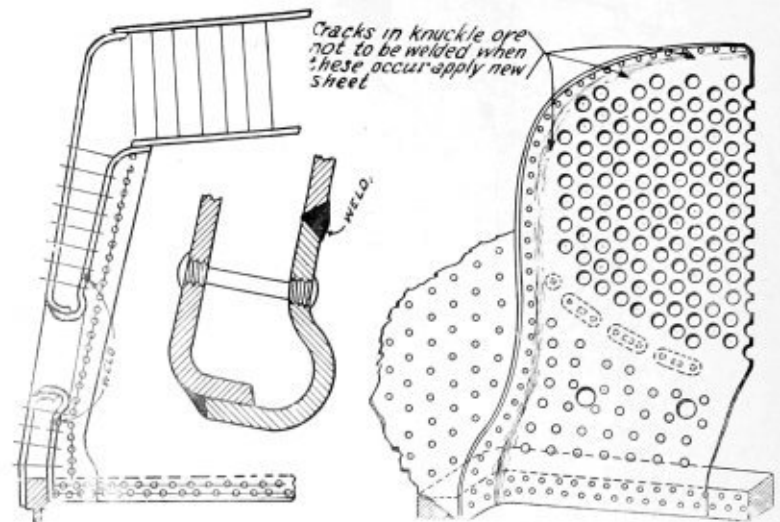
Welding Should Never Be Used in Knuckle of Firebox Sheets
